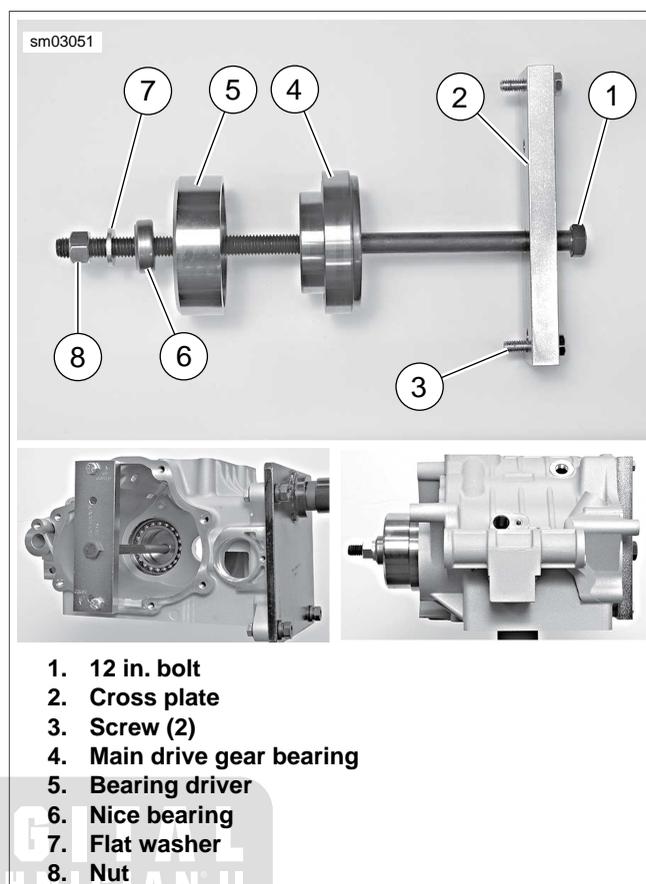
Installing Main Drive Gear Bearing (Typical)
